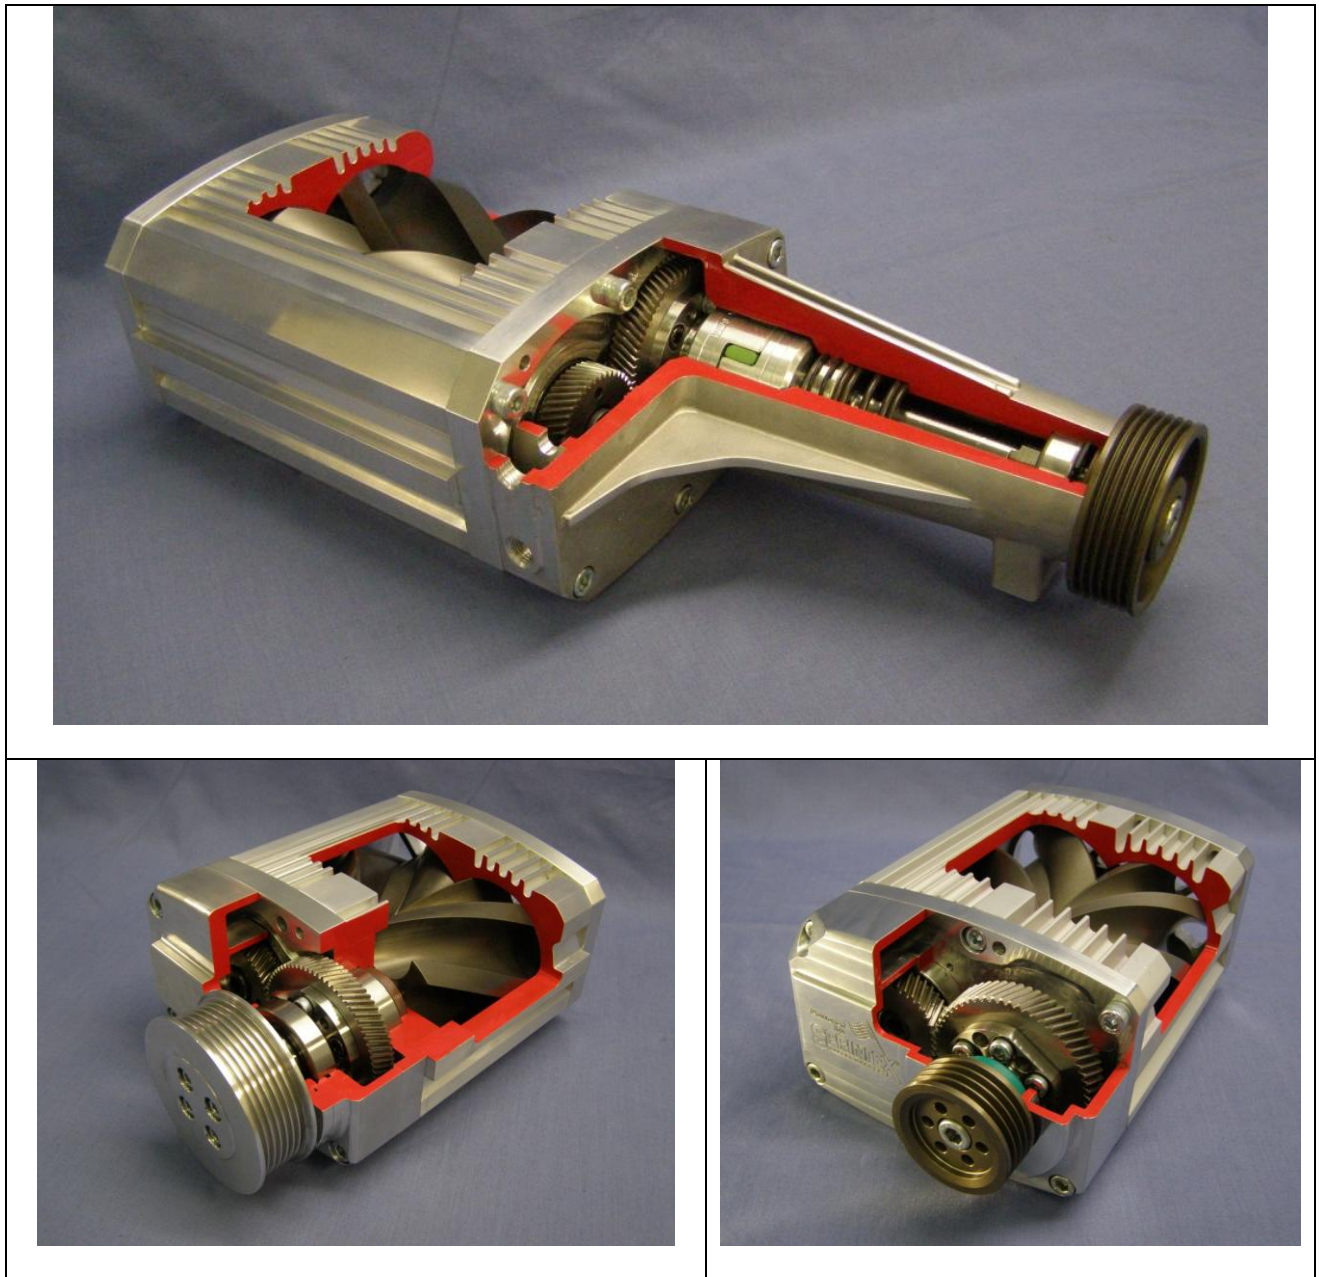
Typical Sprintex superchargers cut-out to expose internal parts
